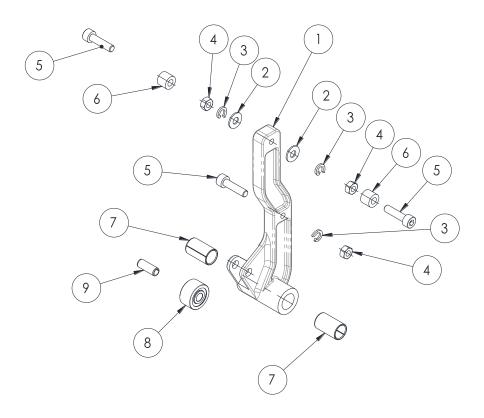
WELDING CLAMP UNIT $^{\circ}$ Ø
